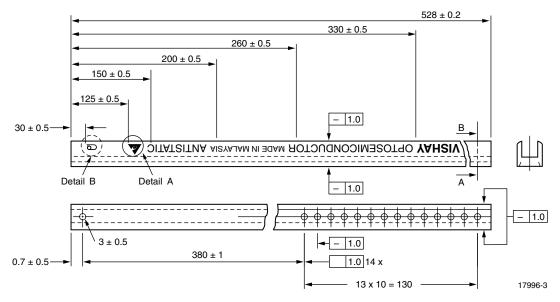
Shipping Tube Specifications for DIP-6 Packages
